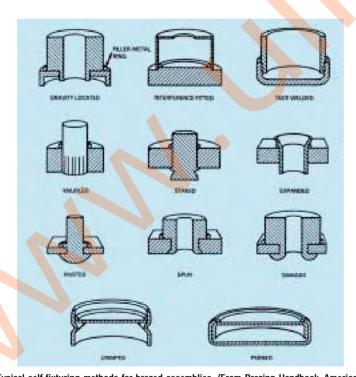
Typical self-fixturing methods for brazed assemblies. (From Brazing Handbook, American Welding Society. Used with permission.)
